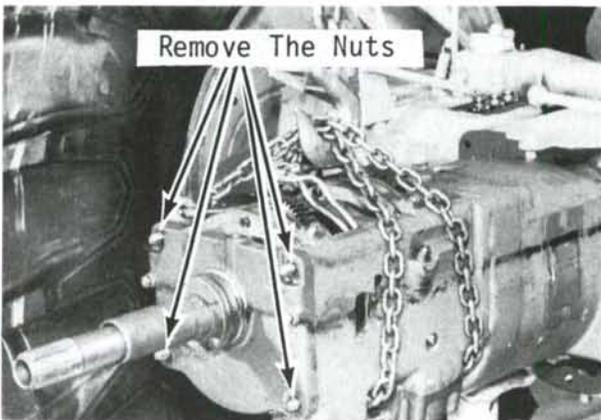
Use a hoist and chain to support power shift unit as shown when removing and installing unit from range gearbox.
